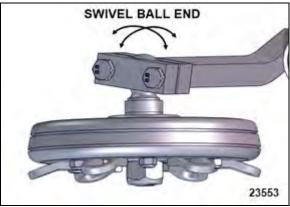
WHEEL ANGLE ADJUSTMENT
